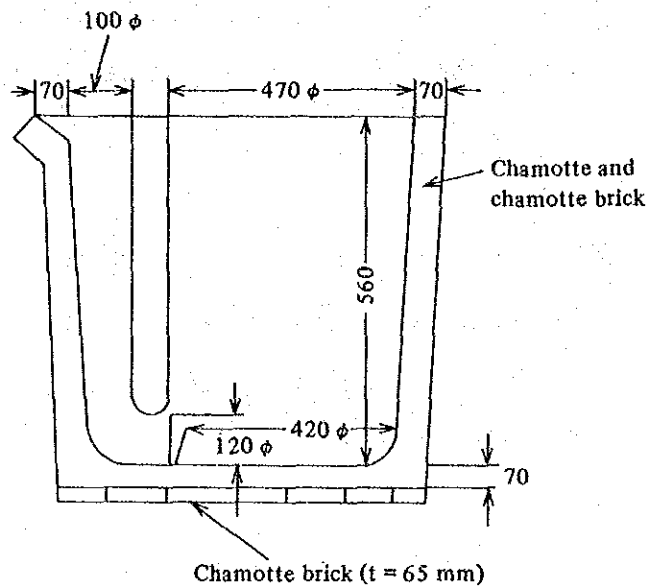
Tea-Pot Ladle for Steel Casting
